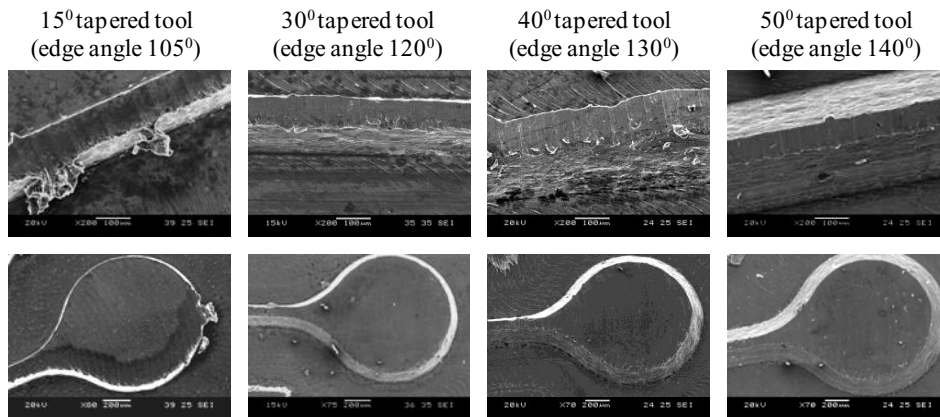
Effect of taper angle on exit burr formation on the micro-features followed by finish face milling pass. The top row shows the channel section of the mould and bottom row shows the conical frustum protrusion section of the mould. The reduction in exit burr formation with increasing taper angle is evident.
